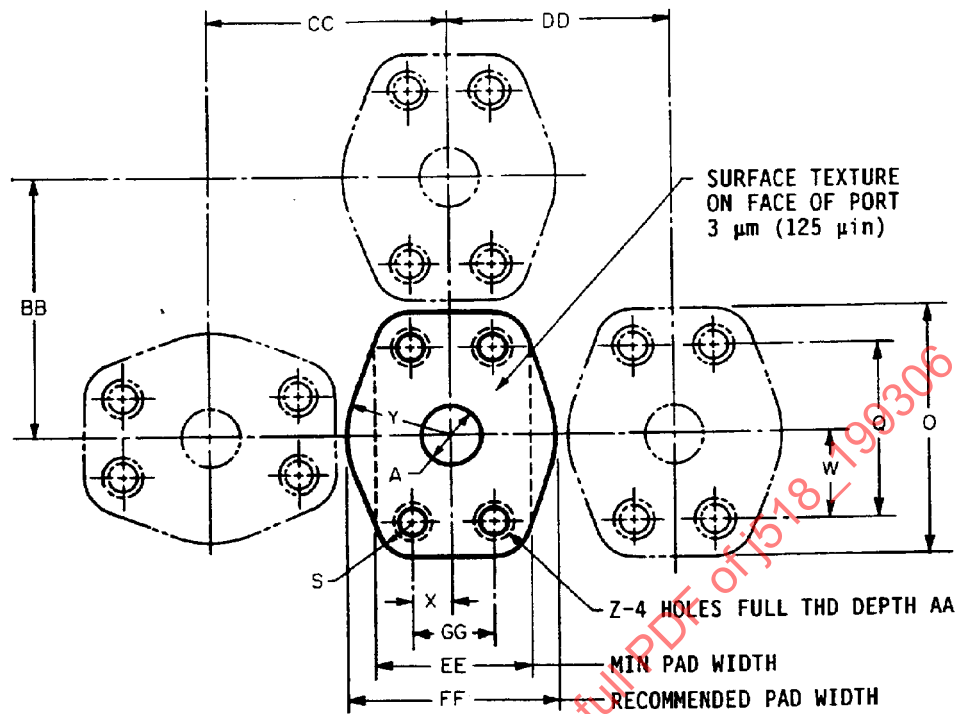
PORT DIMENSIONS FOR HYDRAULIC FLANGED, TUBE, PIPE, AND HOSE CONNECTIONS, FOUR-BOLT SPLIT FLANGE TYPE
